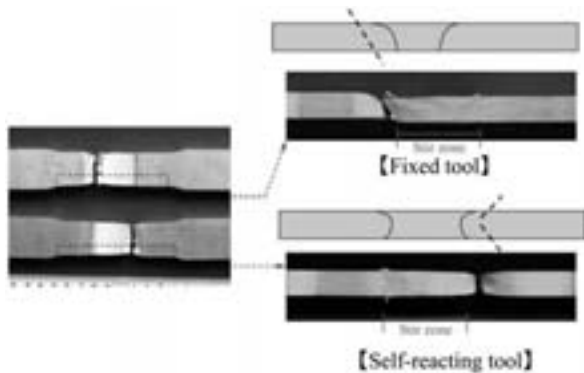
Fractured area on fixed tool and self-reacting tool.
